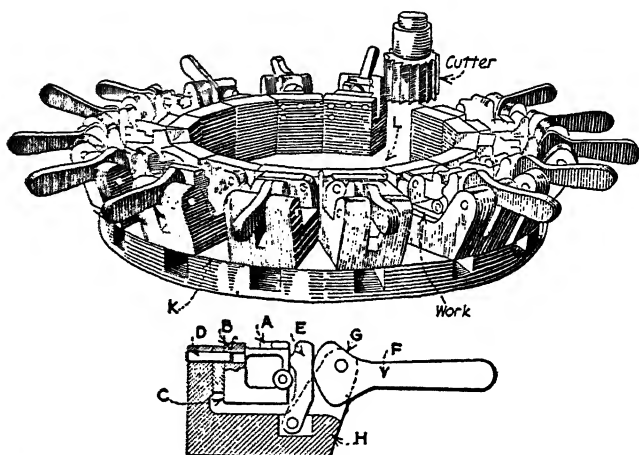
Continuous Circular Milling Fixture for a Bronze Casting
